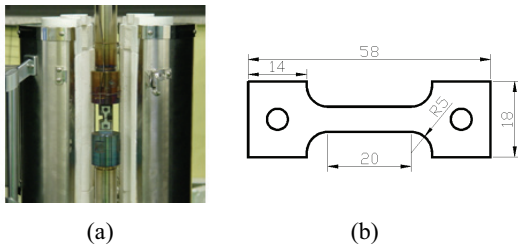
Tensile test equipment and specimen : (a) tensile test equipment, (b) specimen
